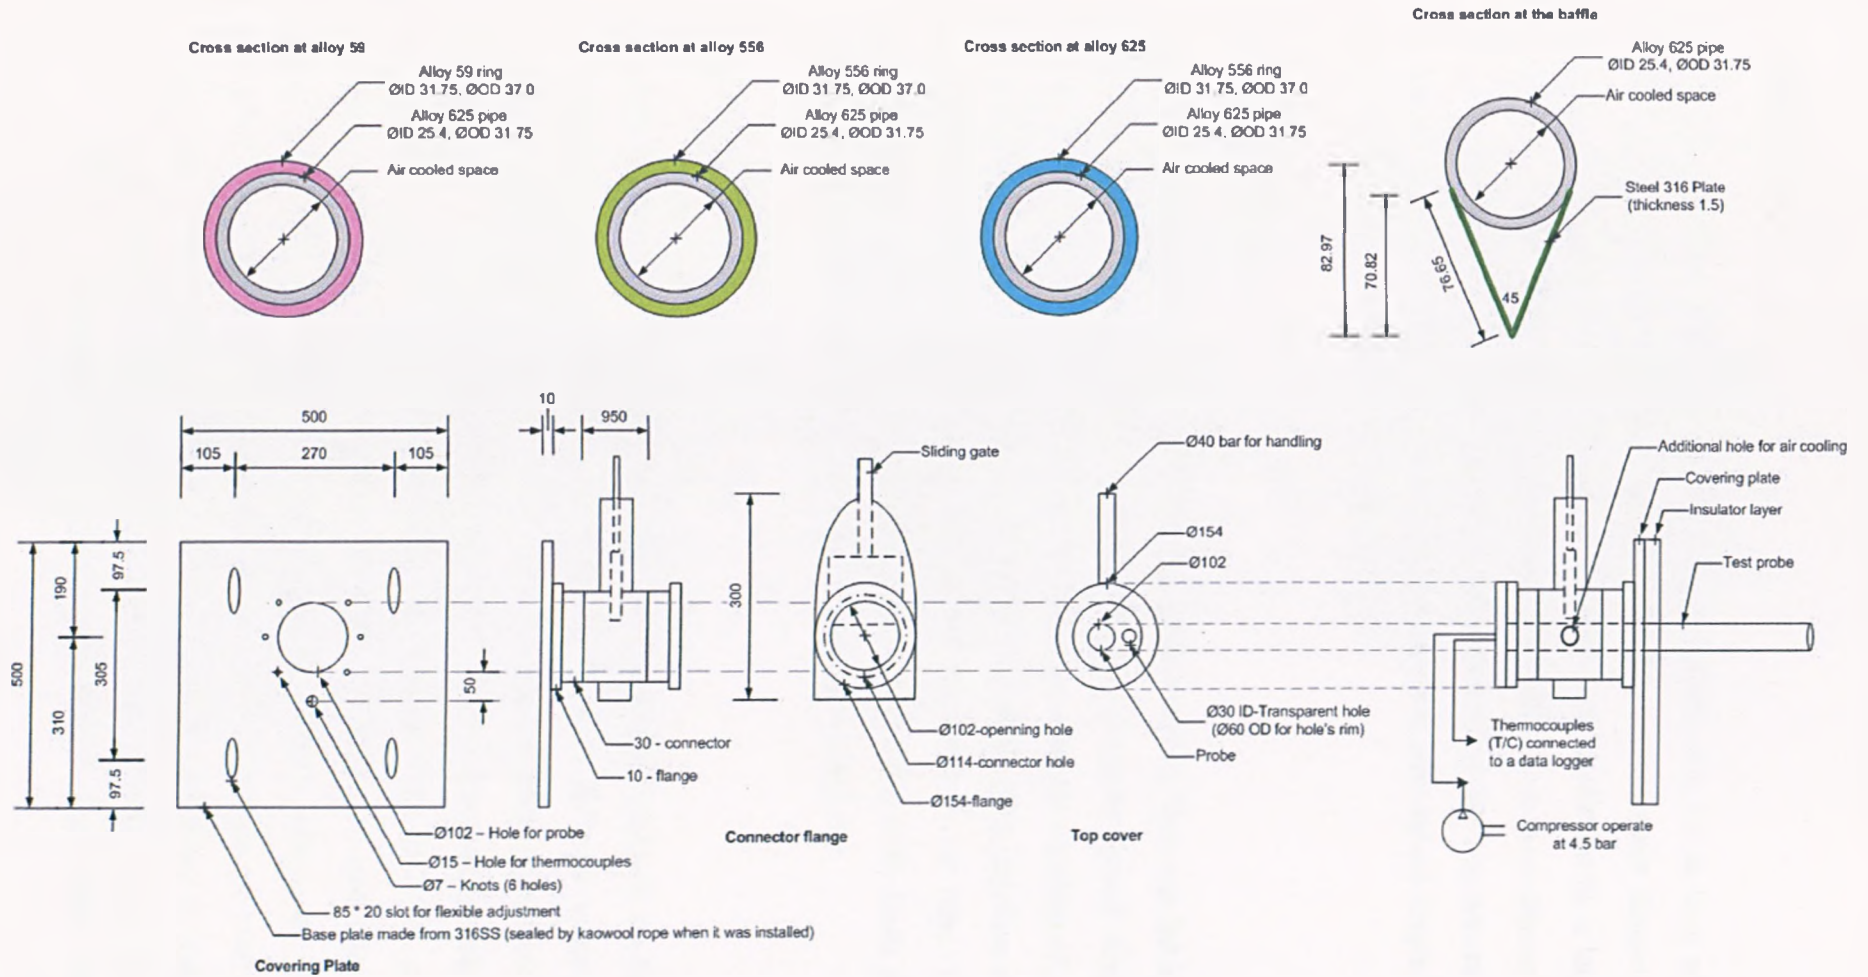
Details of alloy rings, baffle, covering plate and connector flange
